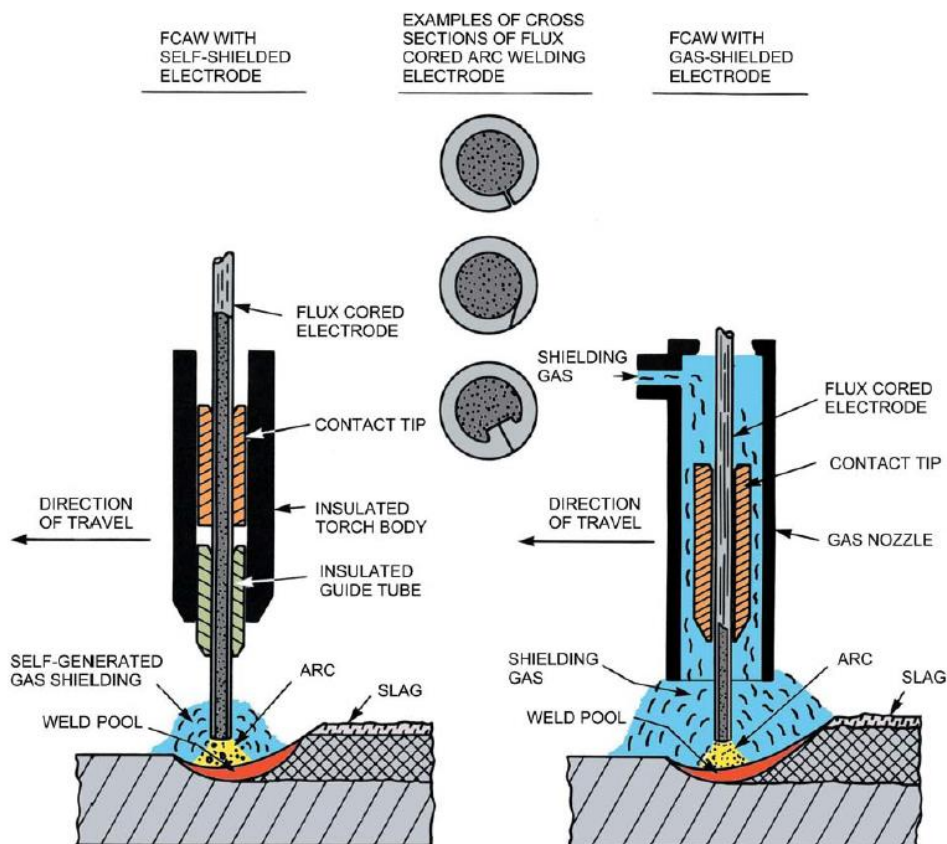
Schematic representation of flux cored arc welding. [27]
